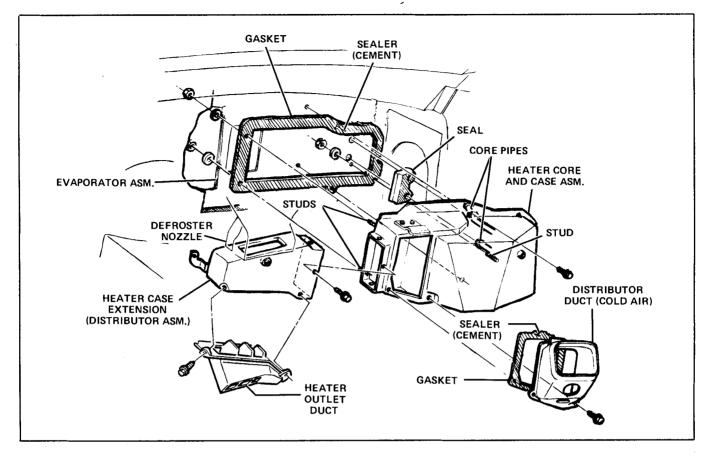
A-122 A/C Heater Core and Case Assembly - X Series
